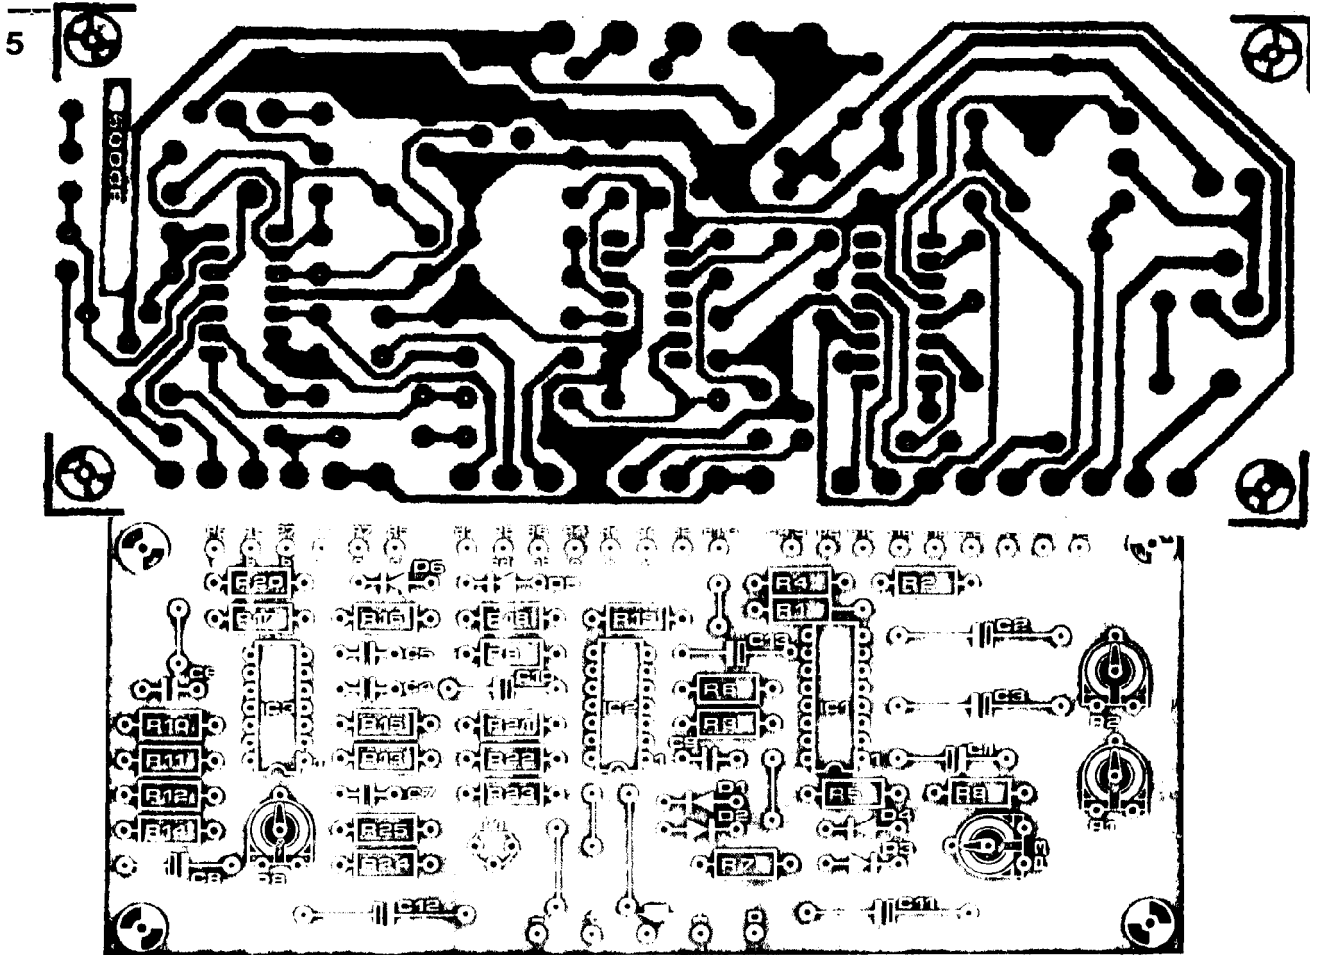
Printed circuit board and component layout for the clock pulse generator.
